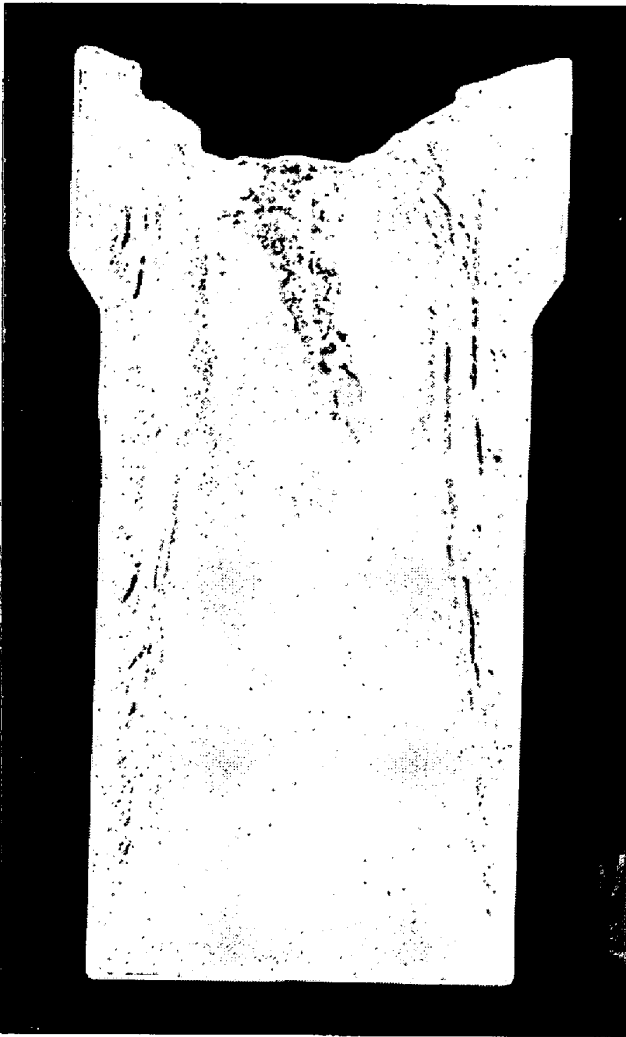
Sulphur print of longitudinal cross section from 3t sand steel ingot.
